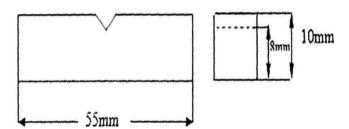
Charpy Impact Test Specimens as per ASTM E23 Standards
